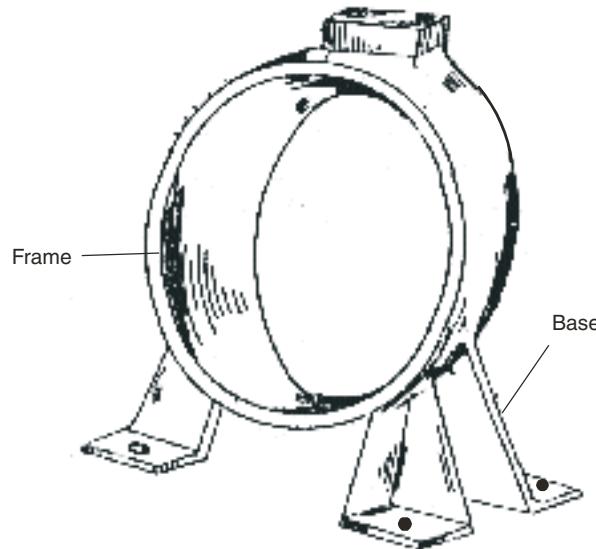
Magnetic circuit and field system of d.c. machine.
